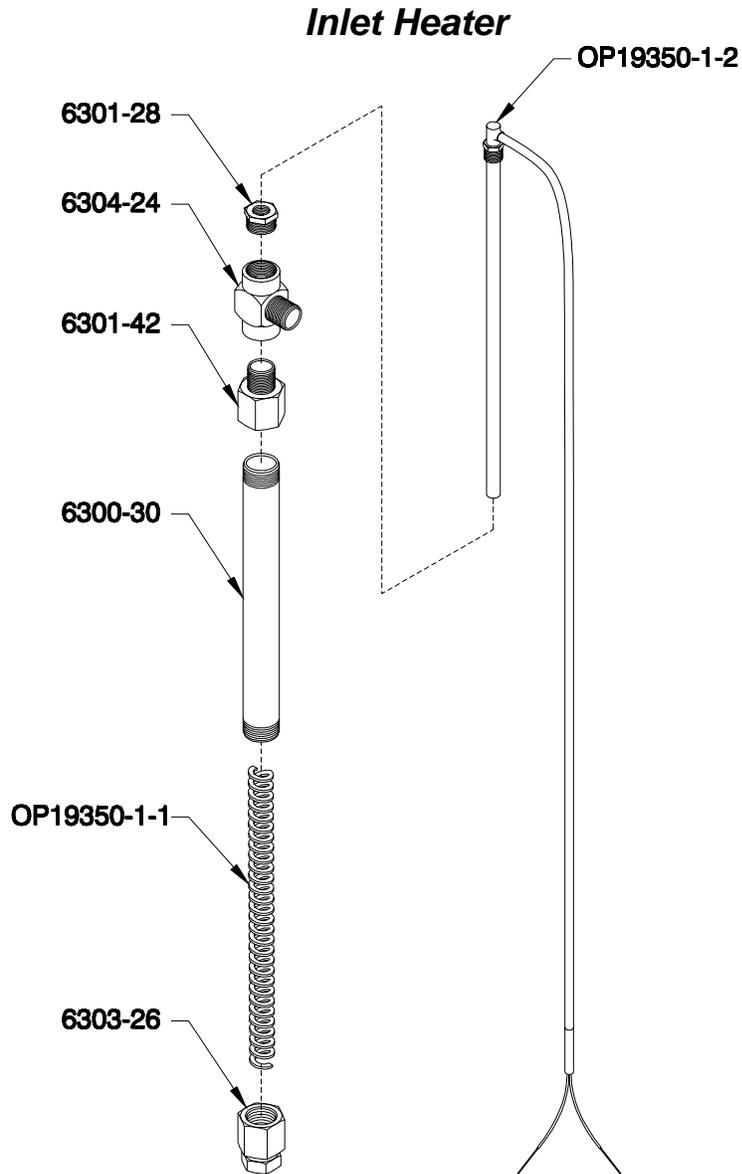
Inlet Heater, (Part No. OP19350-1-220), Exploded View
